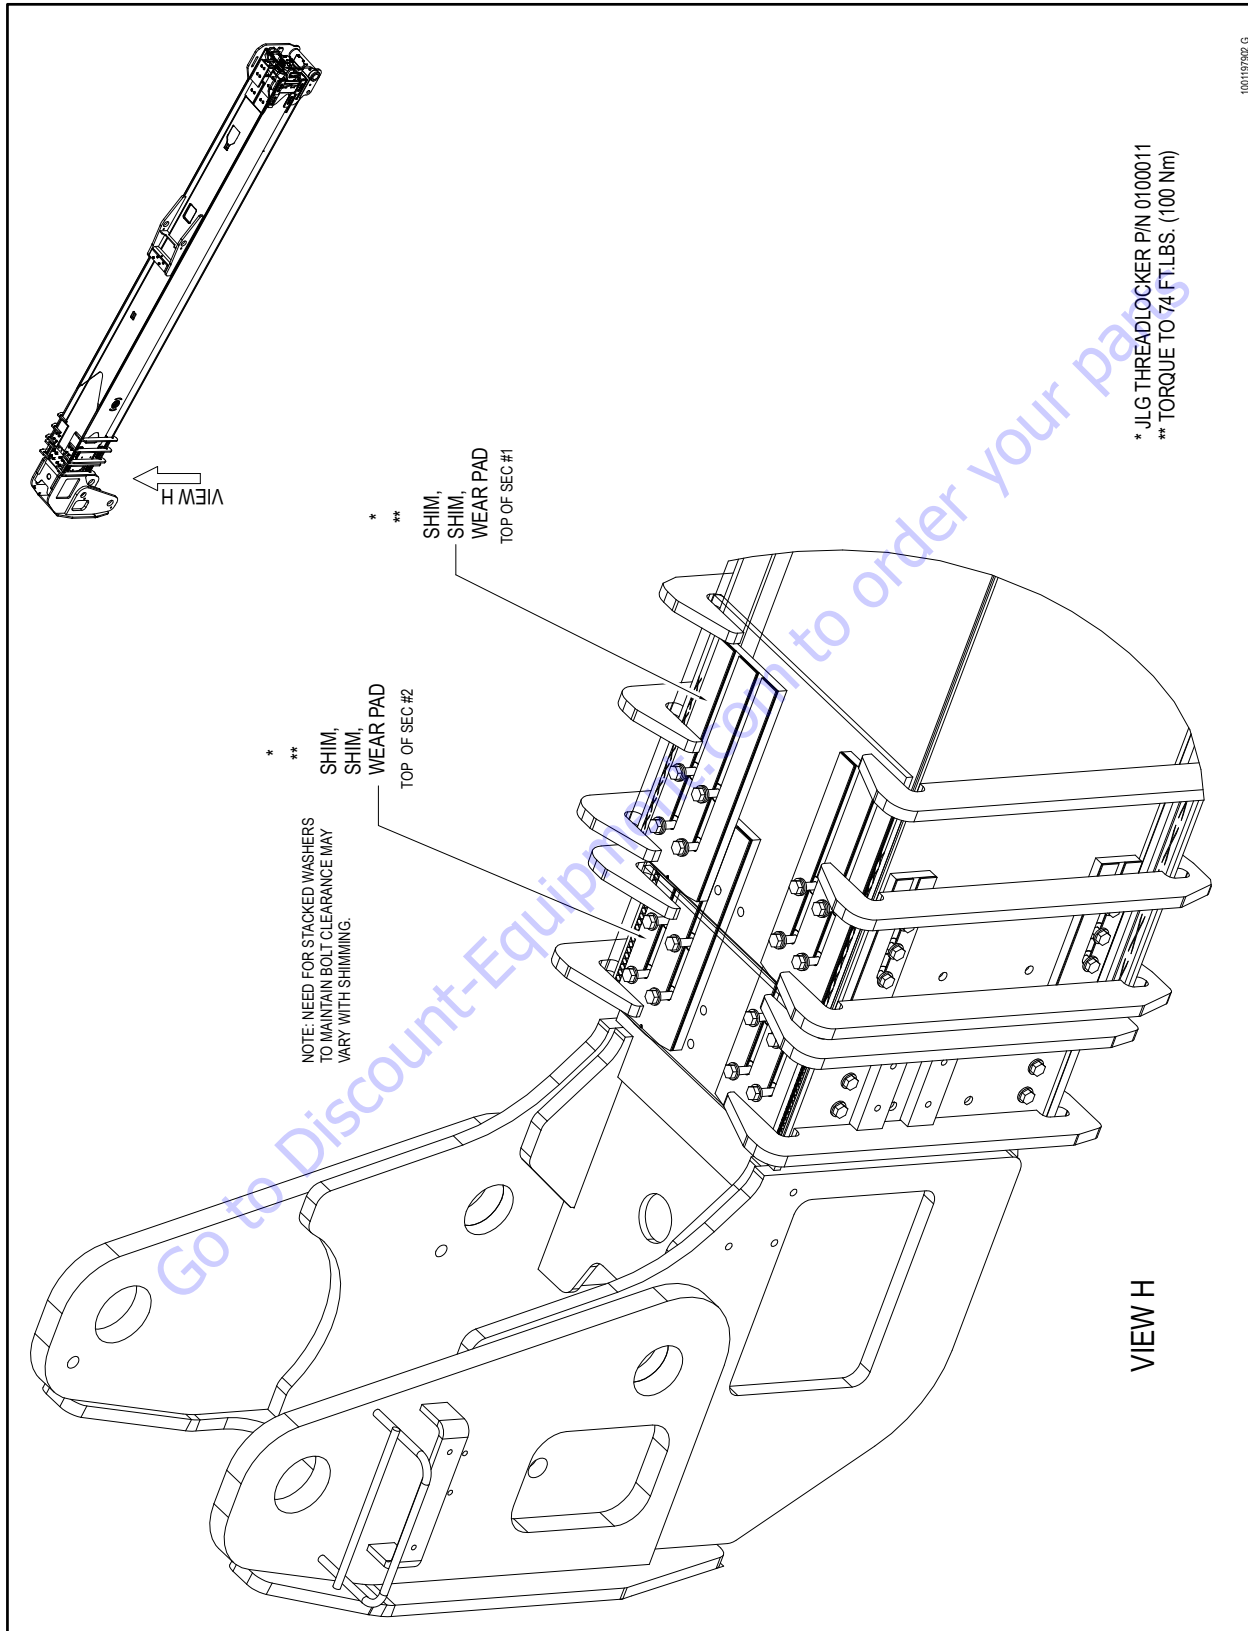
Tower Boom Assembly - Sheet 4 of 6
